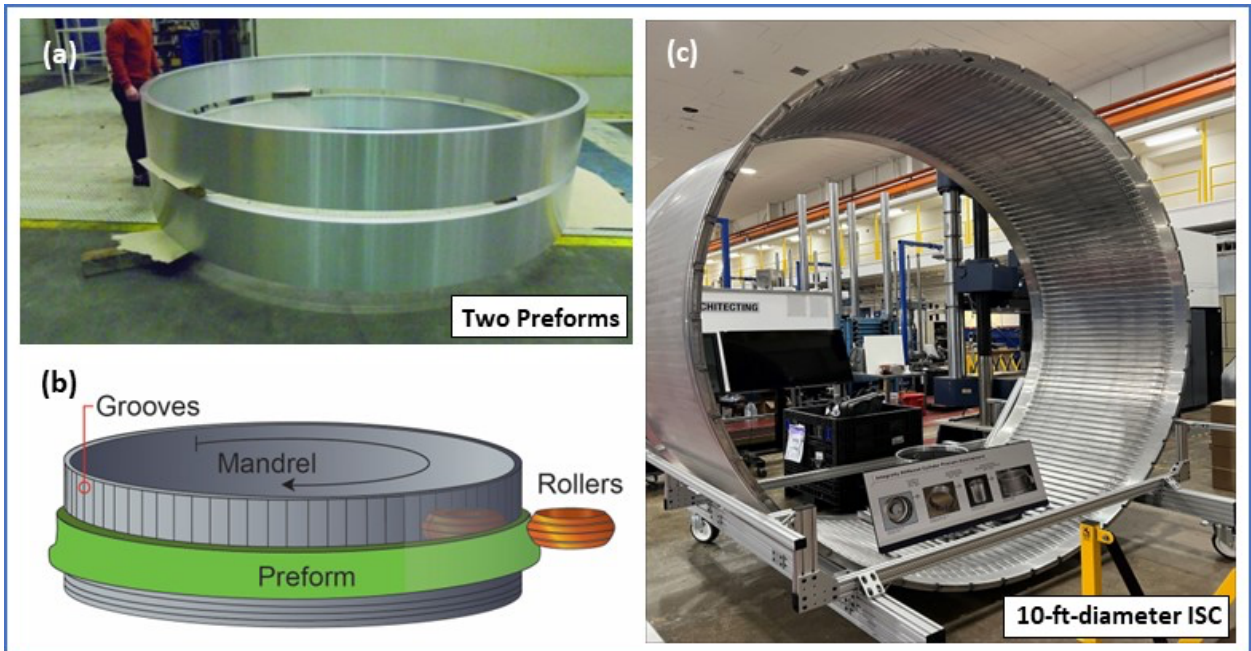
ISC fabrication technology: (a) typical preforms; (b) schematic of process; (c) full-scale barrel section.
